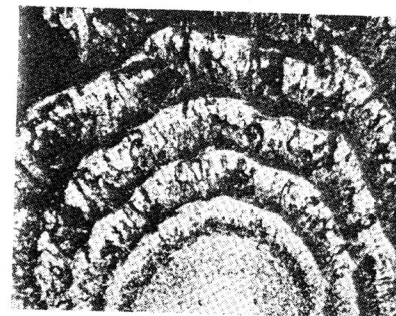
Fracture surface of tensile specimen of polymethyl methacrylate. Molecular weight = 200,000.
